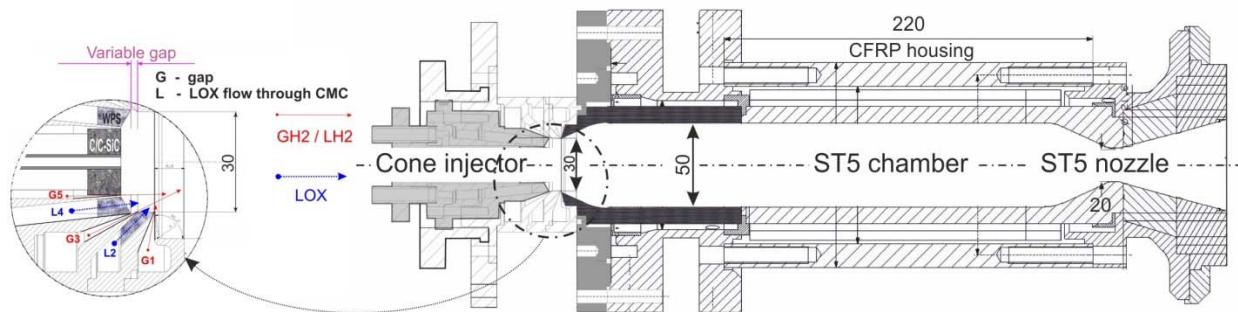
Test set up for the cone injector ignition tests. Faceplate arrangement (left), complete chamber configuration (right).
